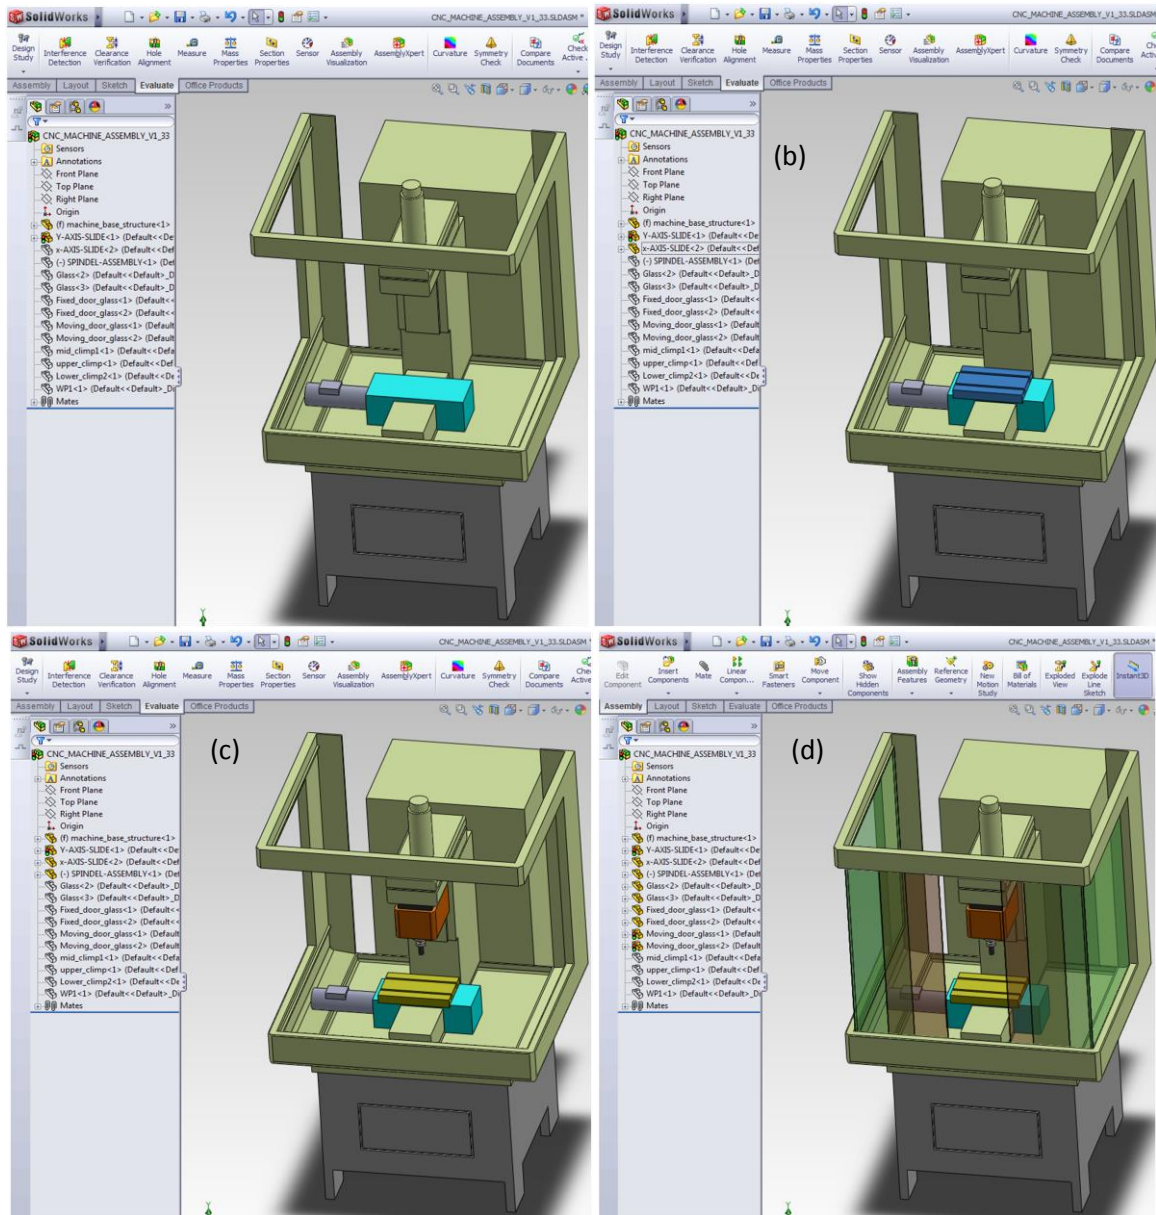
Modeling machine assembly with its slides (X, Y and Z) as well as machine glass guards .
